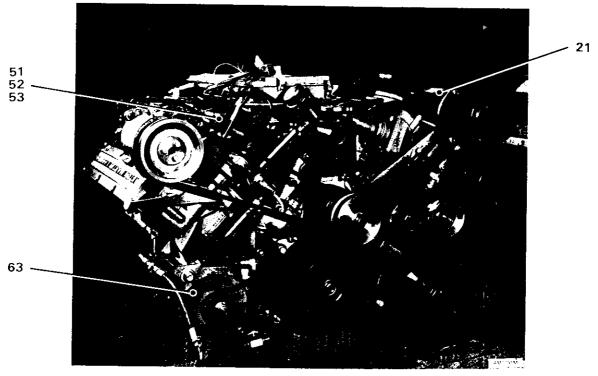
Engine – Front View (Before Installation into Car)
